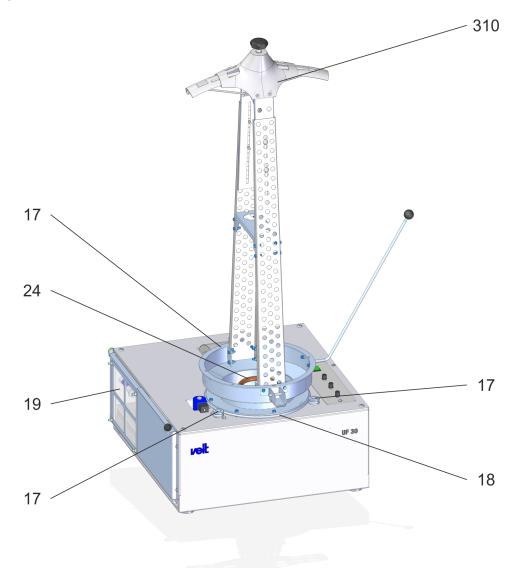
Spare parts for universal finisher Universal finisher with garment attachment
